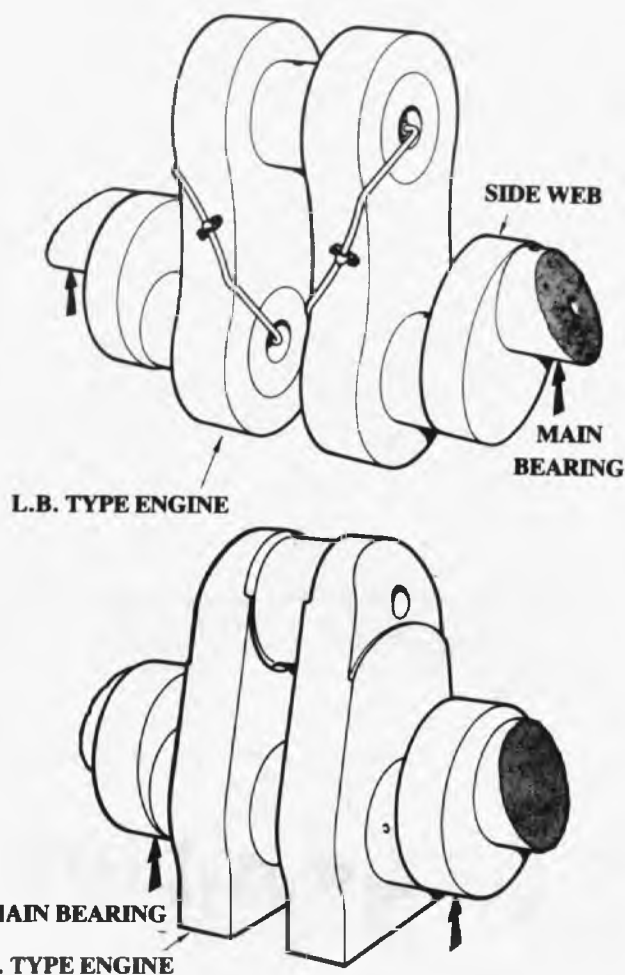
Comparison of LB and J Engine Crankshaft Main Bearing Journals
